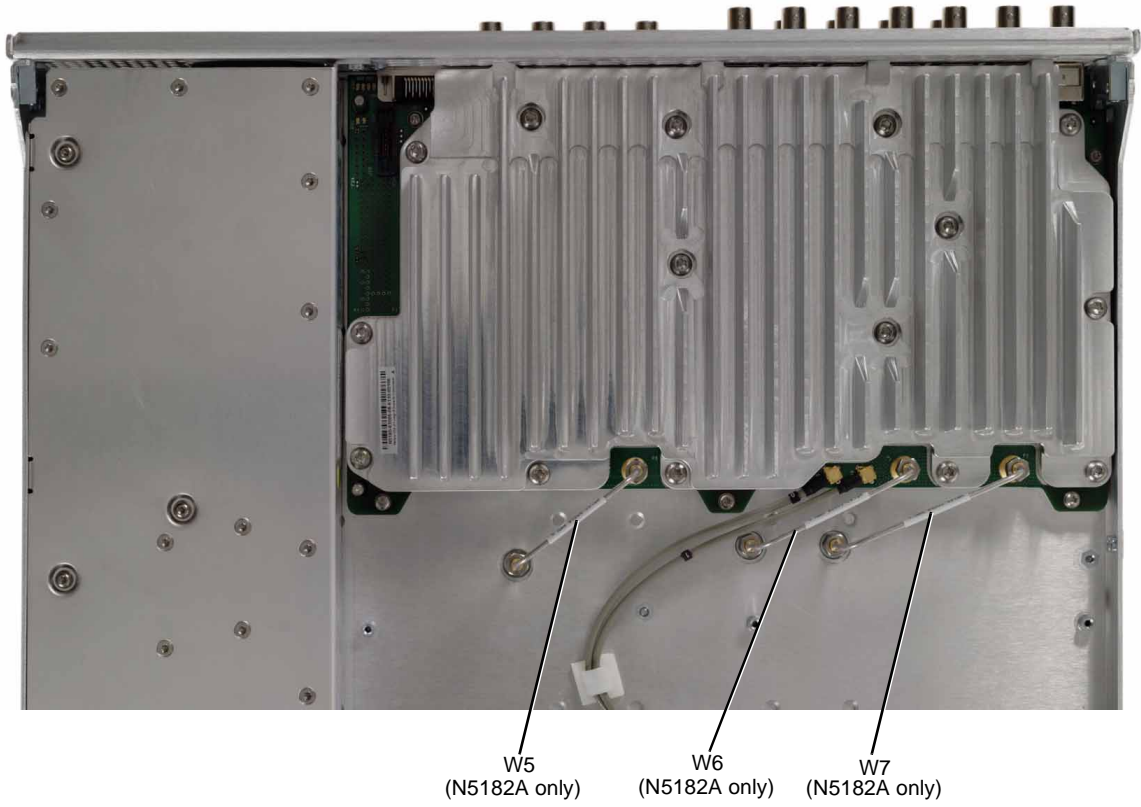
A3 RF Assembly - Standard (2 of 3)
